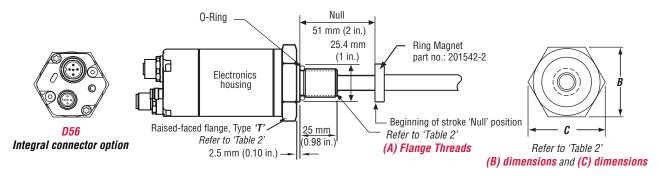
Model RH Rod-style sensor dimension reference (Shown with the D56 Integral cable connection type option)
